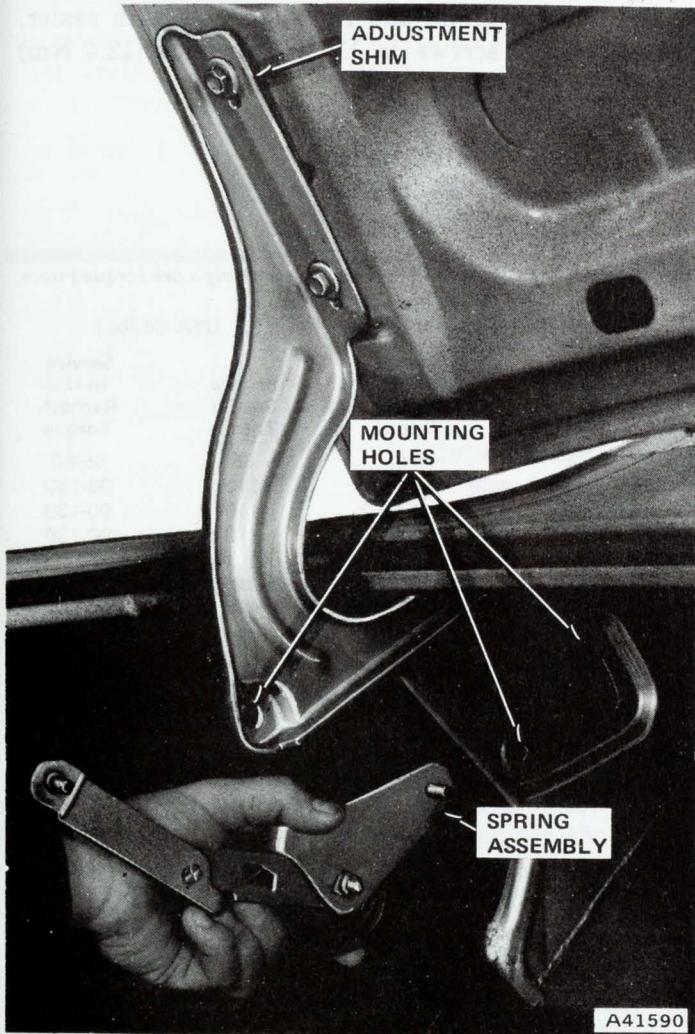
H-52 Deck Cover Hinge and Counterbalance Spring Assembly
